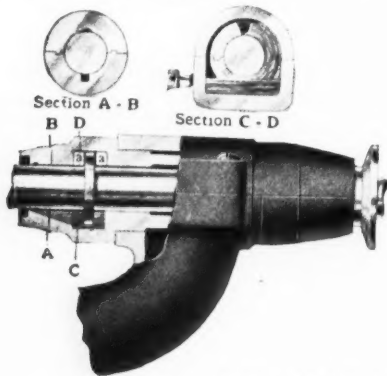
Details of a ring oiler adaptable to the bearings on certain types of grinding machines.
